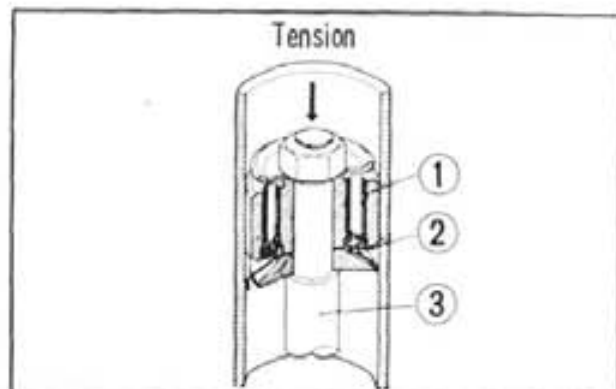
① Piston ② Valve ③ Rod
